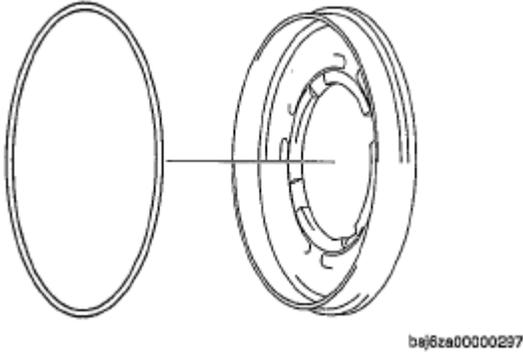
Identifying O-Ring On C2 Clutch Seal Plate
